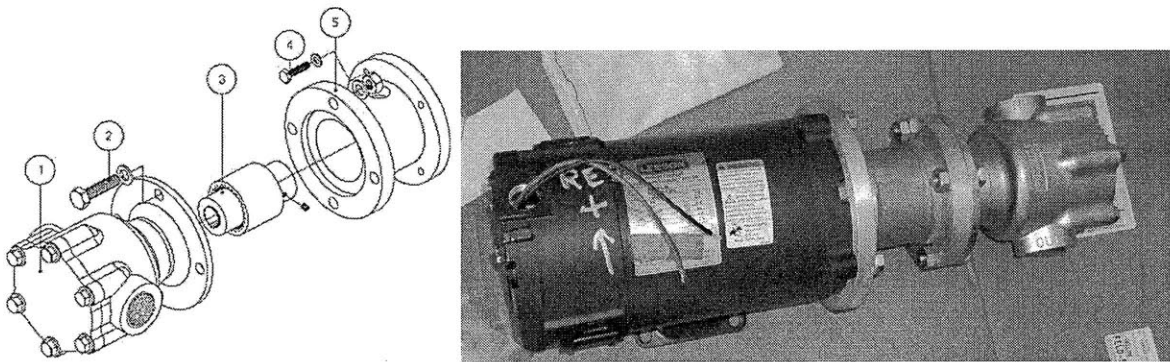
Left: A schematic drawing of the pump(1), motor coupling(3) and flange adapter(5). Right: The pump coupled to its motor.
